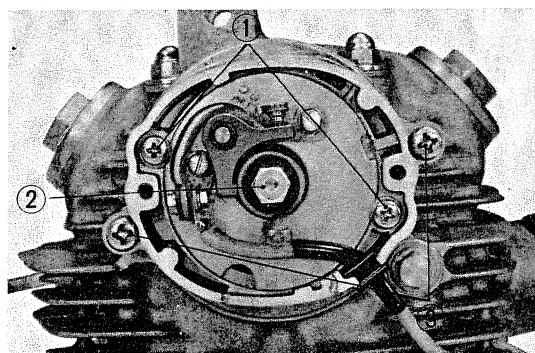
① 5mm screws ② 6mm bolt ③ 6mm screws
